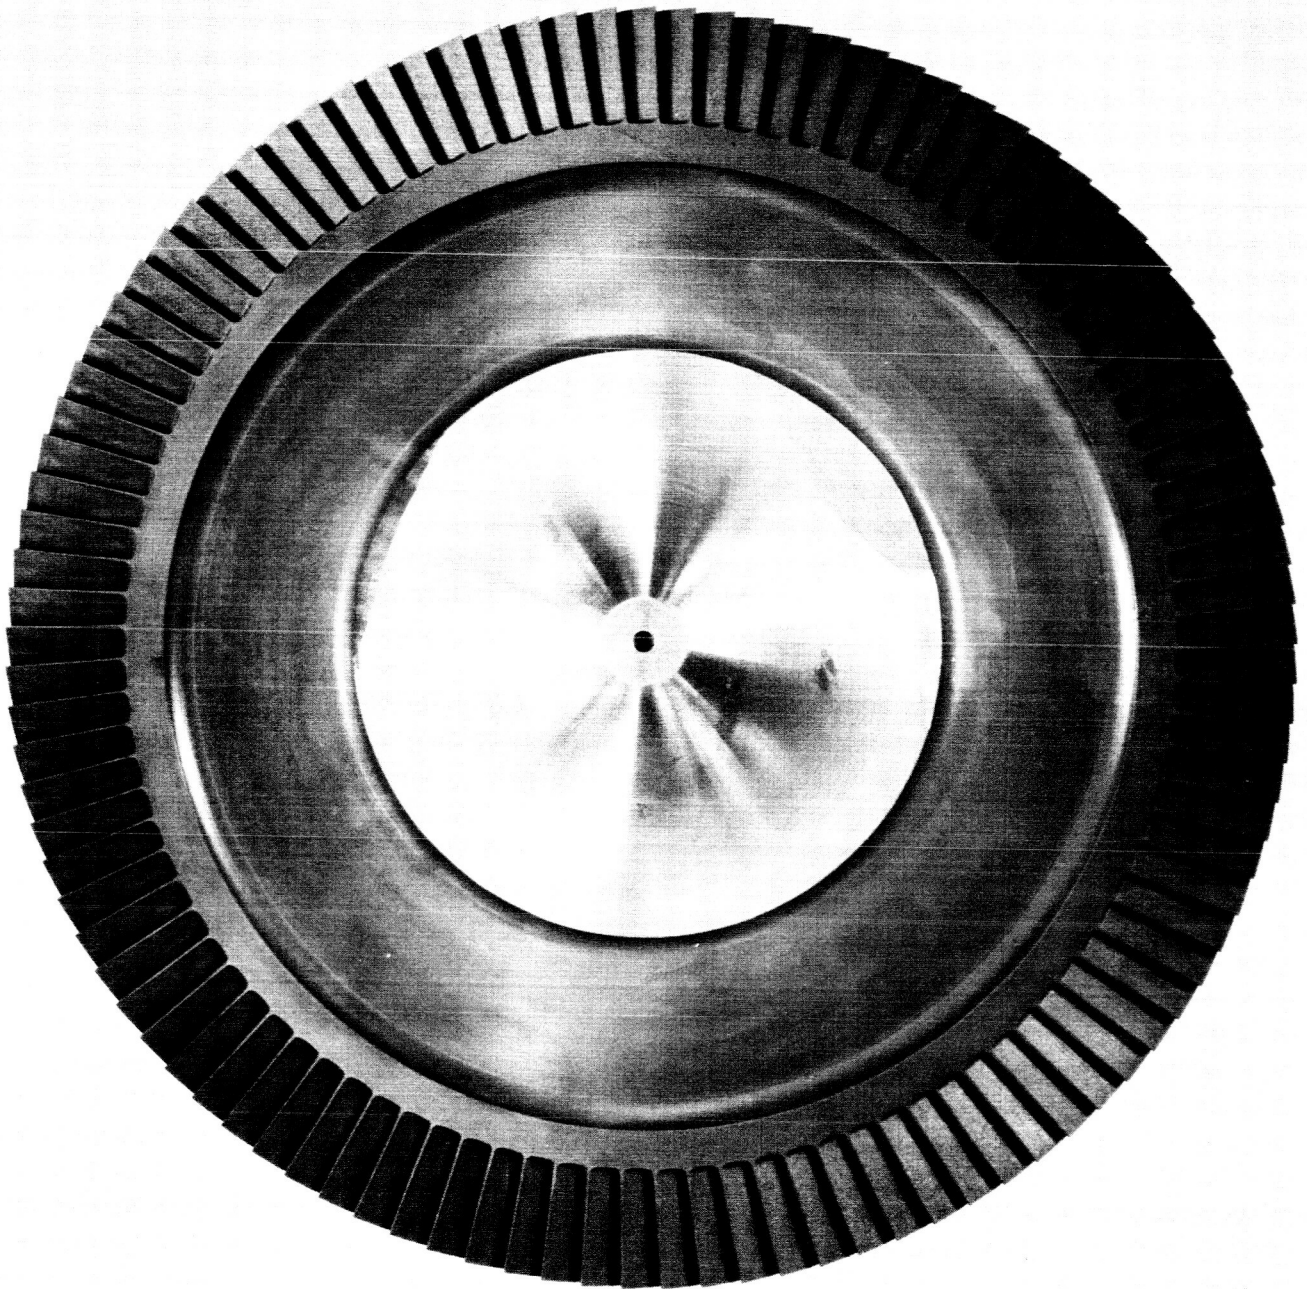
TURBINE WHEEL - EXHAUST SIDE
